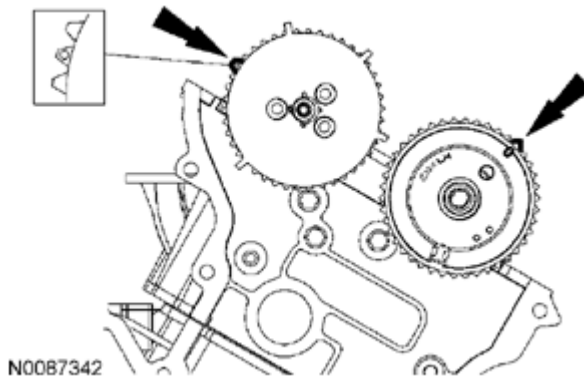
Identifying LH Camshafts Are In Neutral Position
